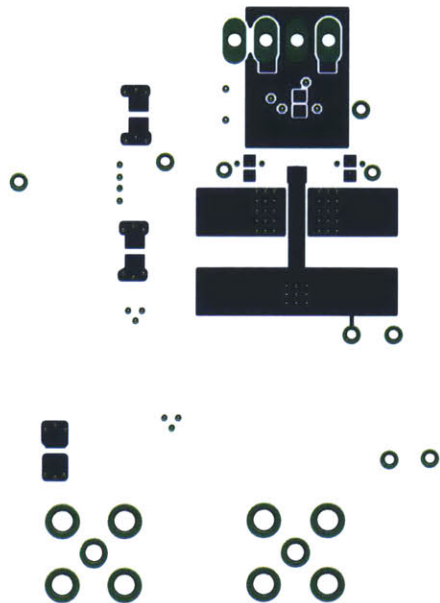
The Layer 4 PCB Layout of the Frequency Multiplier Prototype.
